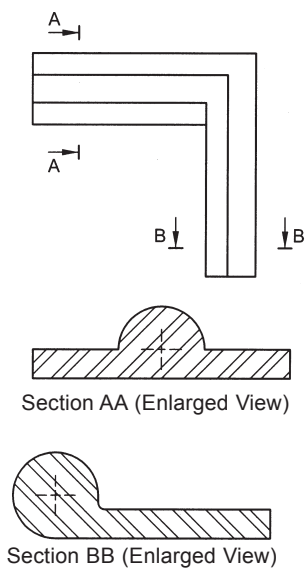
DETAILS OF MOULDED CORNER SEAL
